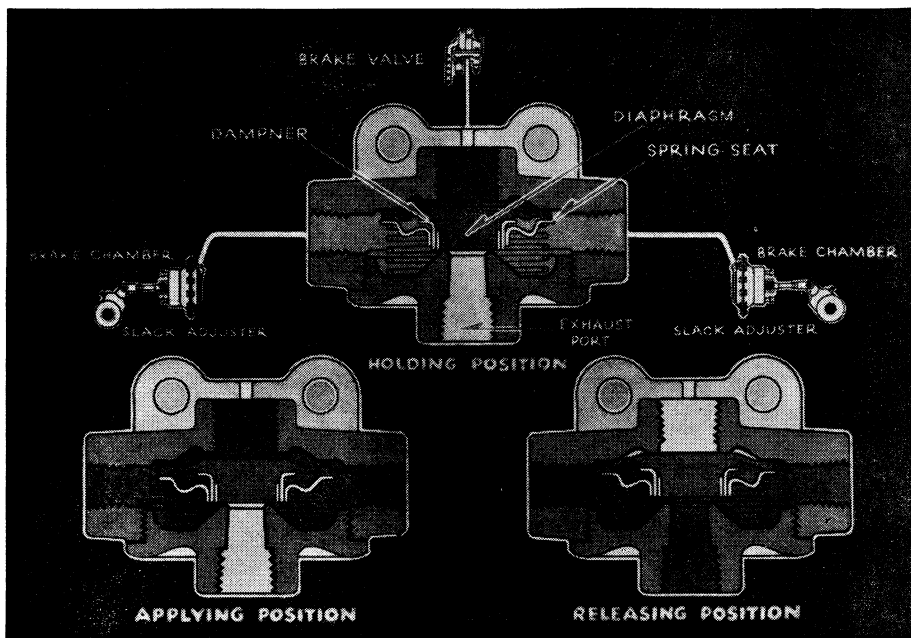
Applying, holding and releasing positions of Quick Release Valve
